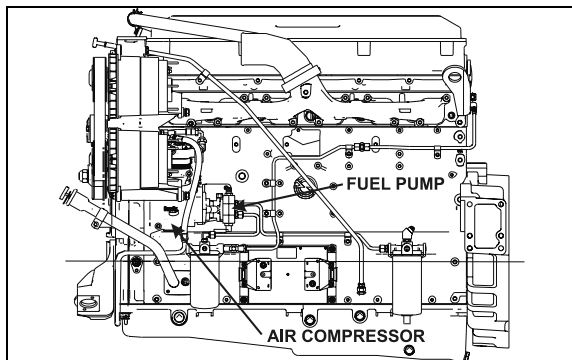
AIR COMPRESSOR LOCATION 03061
